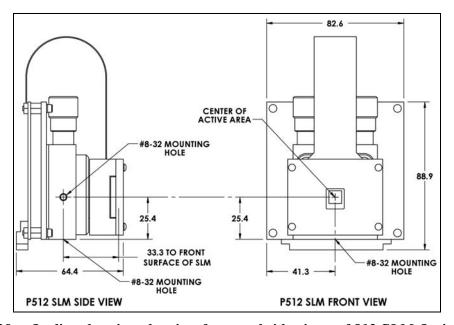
~ Outline drawing showing front and side views of 512 SLM Optical Head.
